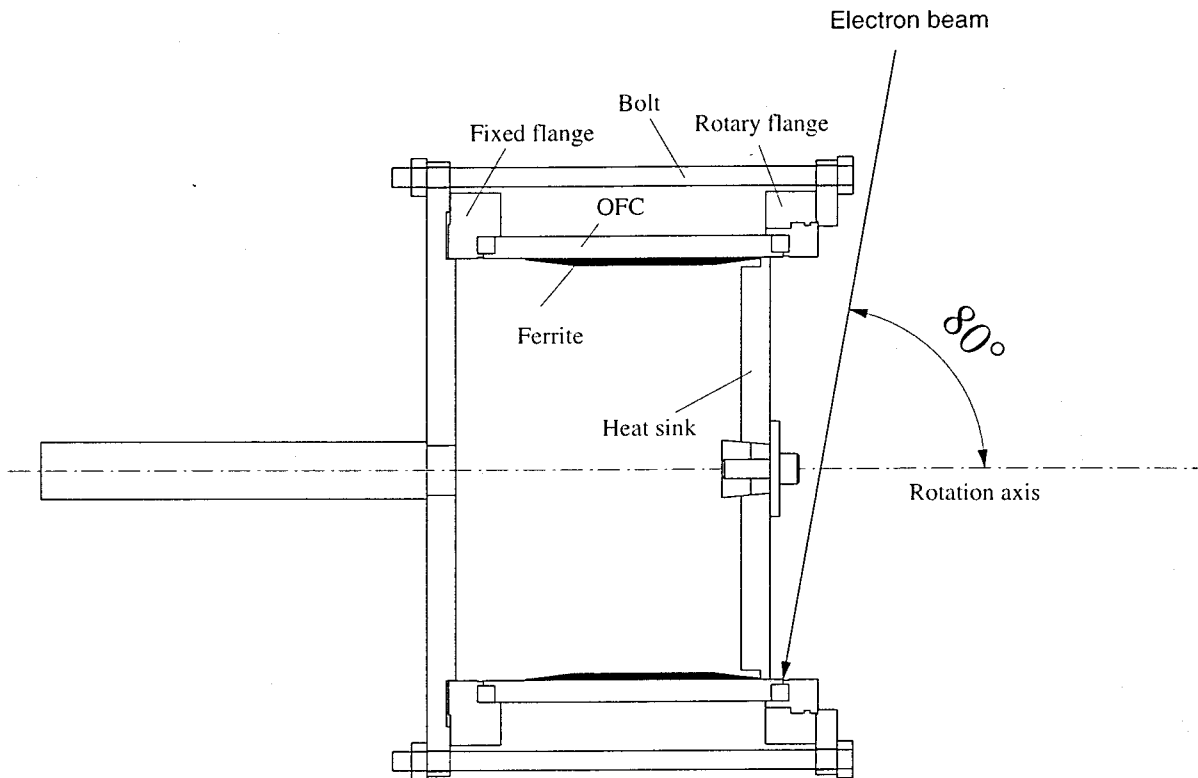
The set-up for EBW (Electron Beam Welding).
